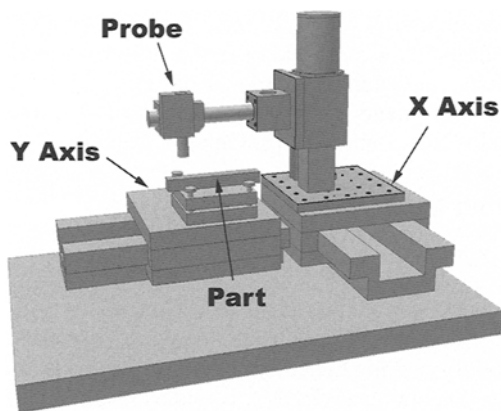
Setup of laser contouring system, shown with generic part rather than the weld specimen described in this paper
